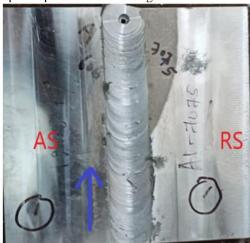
Welded Plate and Rear Face of The Plate
